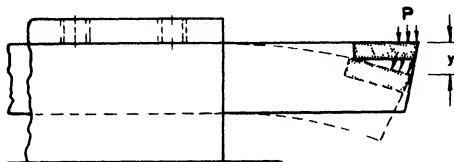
Exaggerated Drawing Showing How the Cutting Force Causes Deflection
